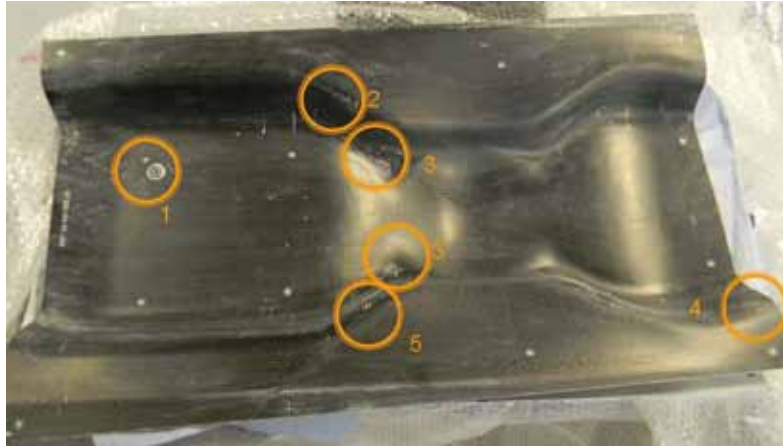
Location of surface defects in specimen 300-335-HZ-01-004
